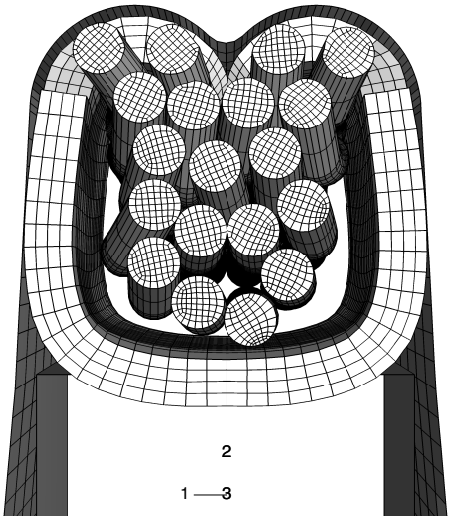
Deformed shape after 76 ms (front view).
